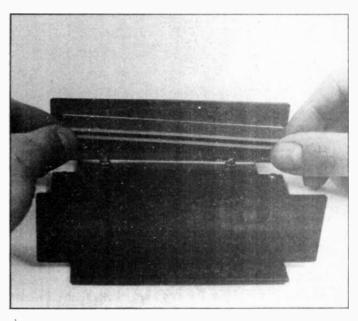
PCB guide-rails make an easy method of positioning and holding circuit boards
